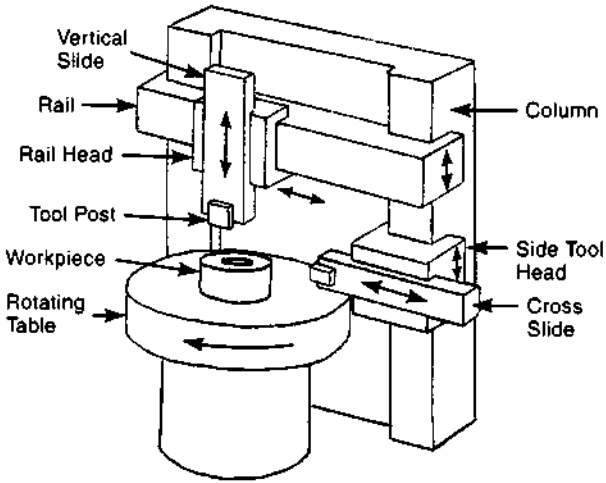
B5c A vertical boring mill. (vertical boring and turning machine.)
